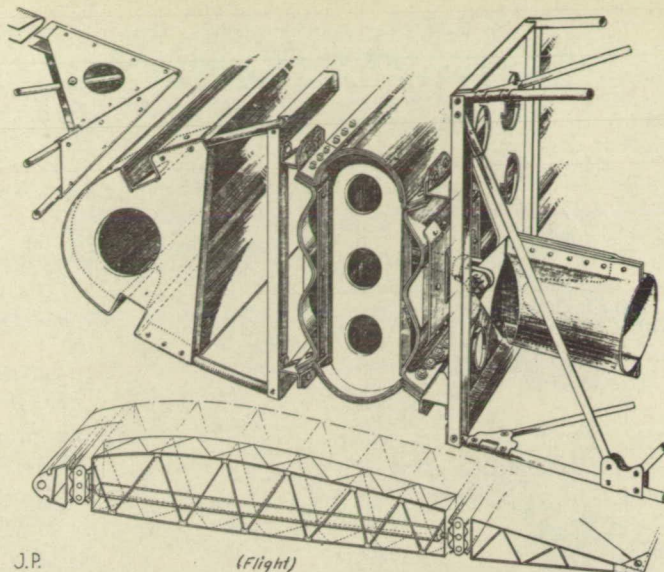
Wing details: Duralumin spars and ribs, with steel fittings, are used in the Short "Scylla" airplane.
